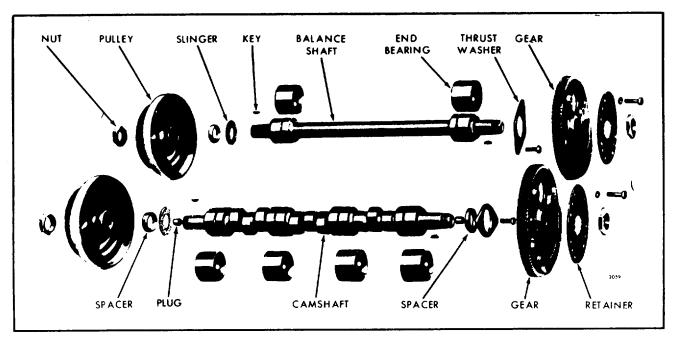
Camshaft and Balance Shaft Details and Relative Location of Parts
